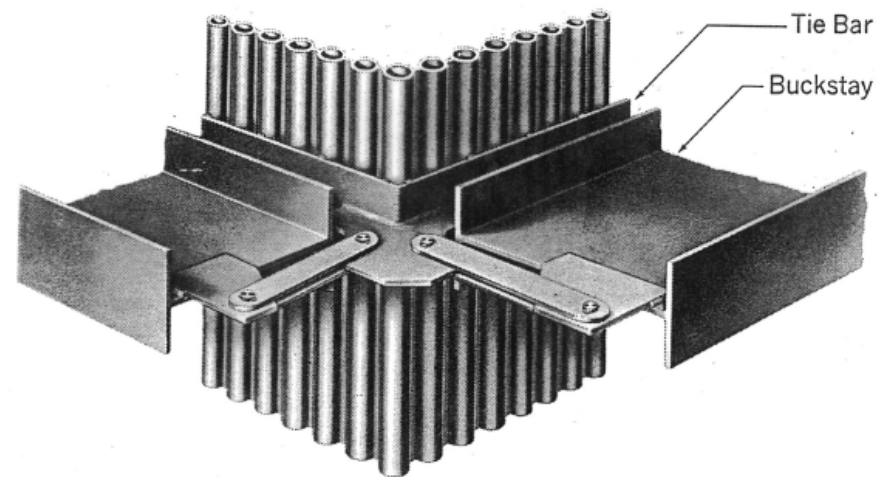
Tie bar and buckstay arrangement at corner of furnace.
